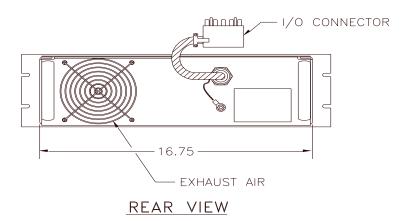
OUTLINE DRAWING, MODELS 140, 160, 345 & 360-ASX MAGNETICS MODULE
